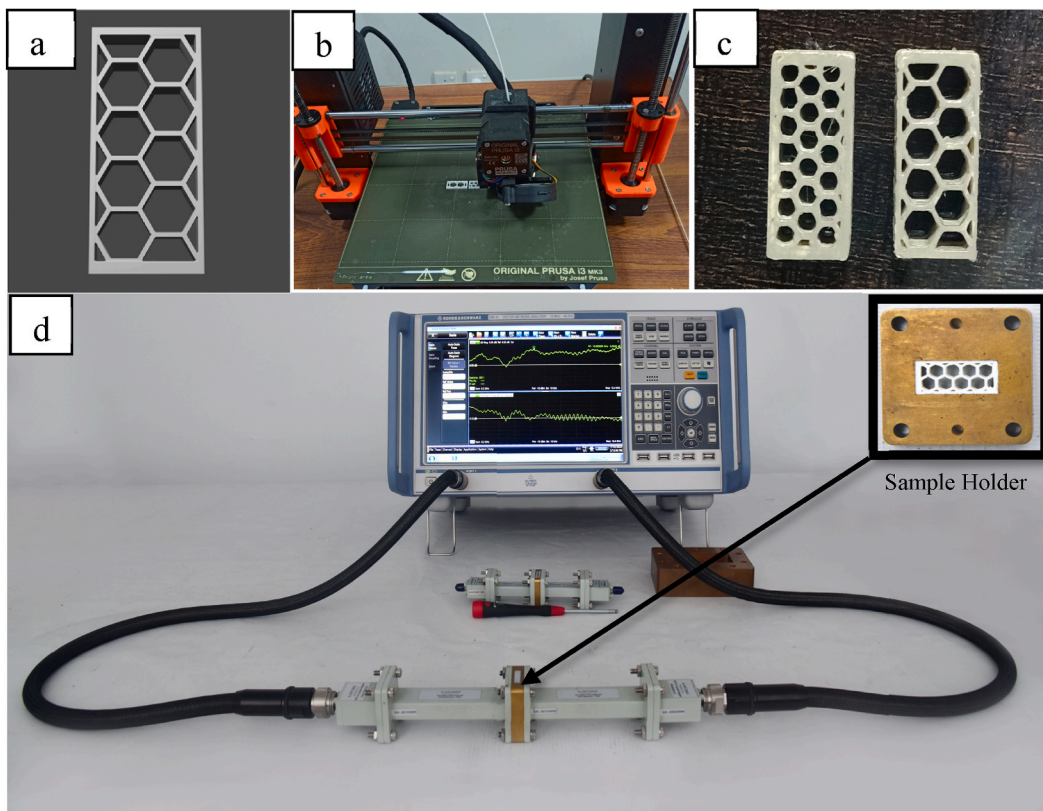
Steps involve in the fabrication of honeycomb structure a) 3D design modeling and slicing b) 3D printing c) spray coating of AgNWs d) measurement of EMI shielding.
